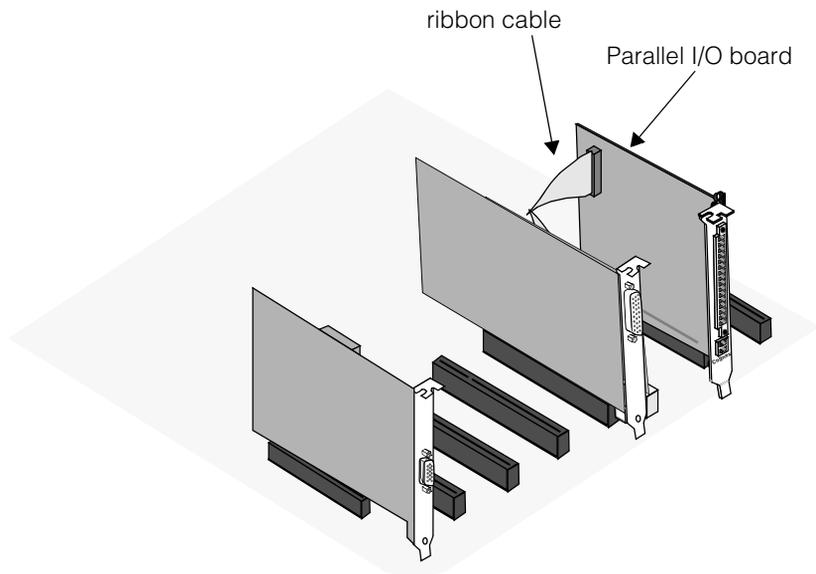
Single ISA parallel I/O board installed with MVS-8120
